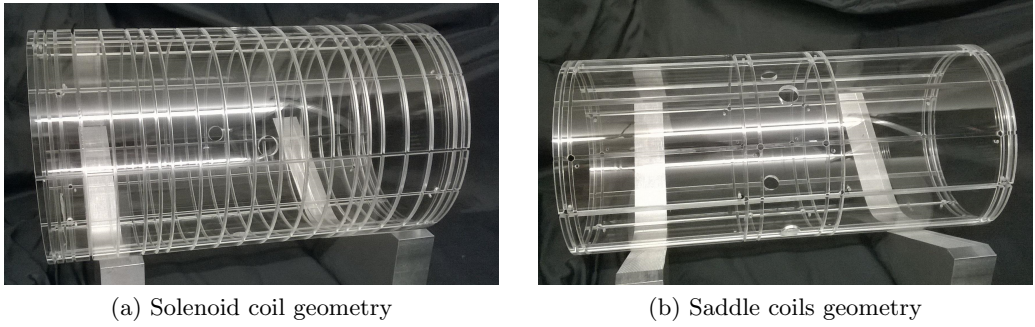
Acrylic tubes machined with channels of the desired geometry before coils wrapping.
